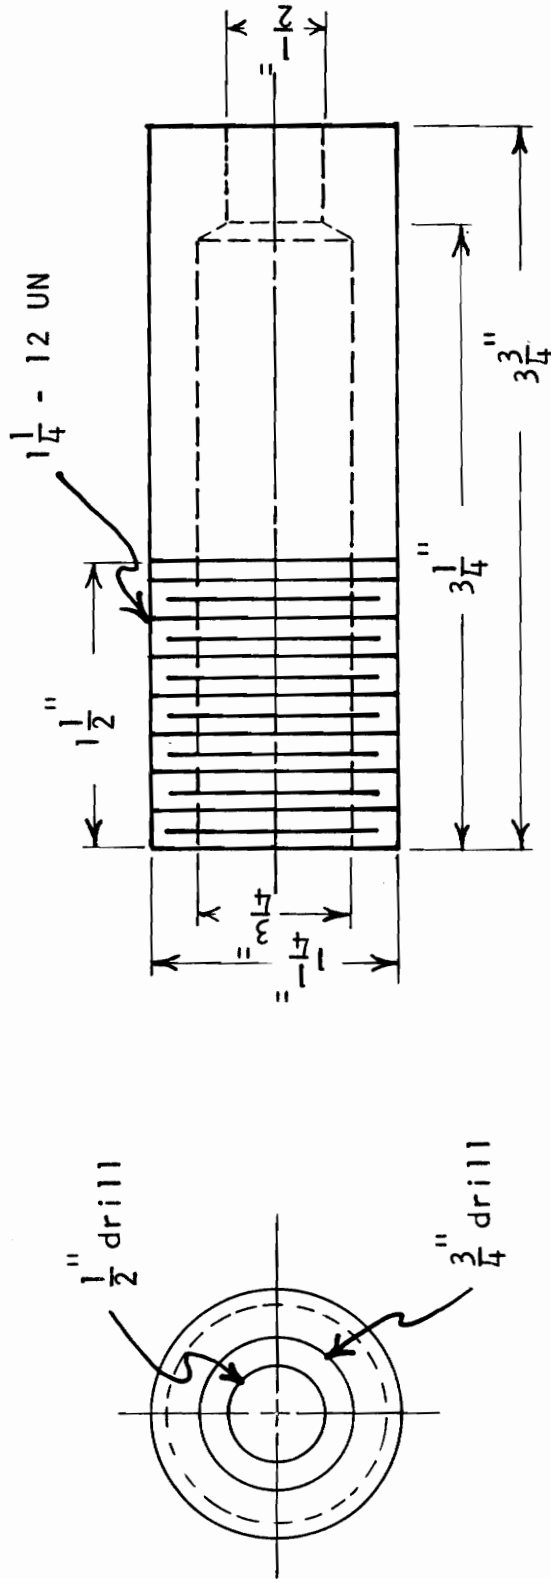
Diagram of Sensor Disk Number One Holder Tube
